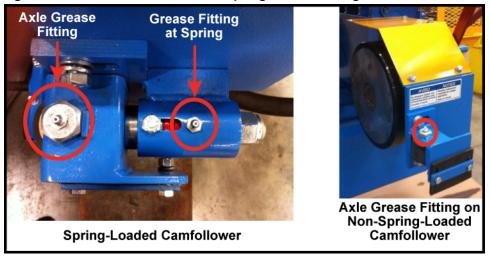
Guide Wheel Axle and Spring Grease Fitting
